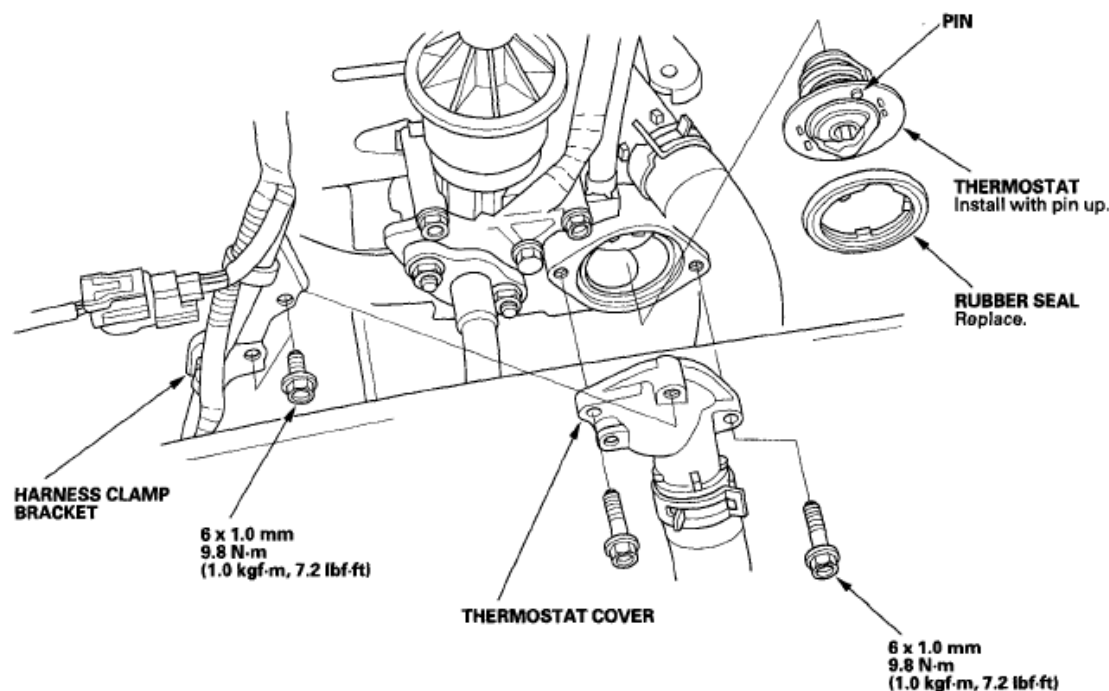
Identifying Thermostat Cover With Tightening Torque
